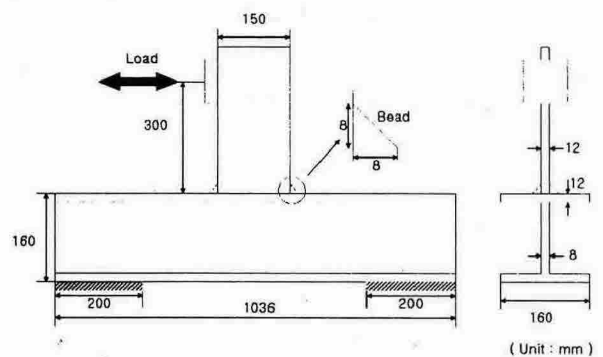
Details of test model (boxing fillet welded joint)
